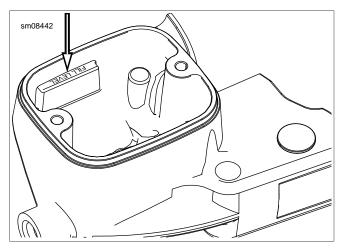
FILL LEVEL Boss (clutch master cylinder)
